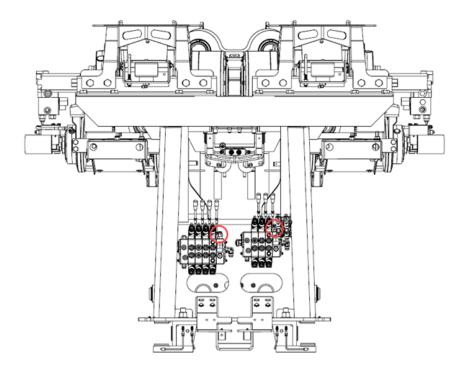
POSITION OF THE VALVES ADJUSTING SCREWS IN THE BOOM BASE
